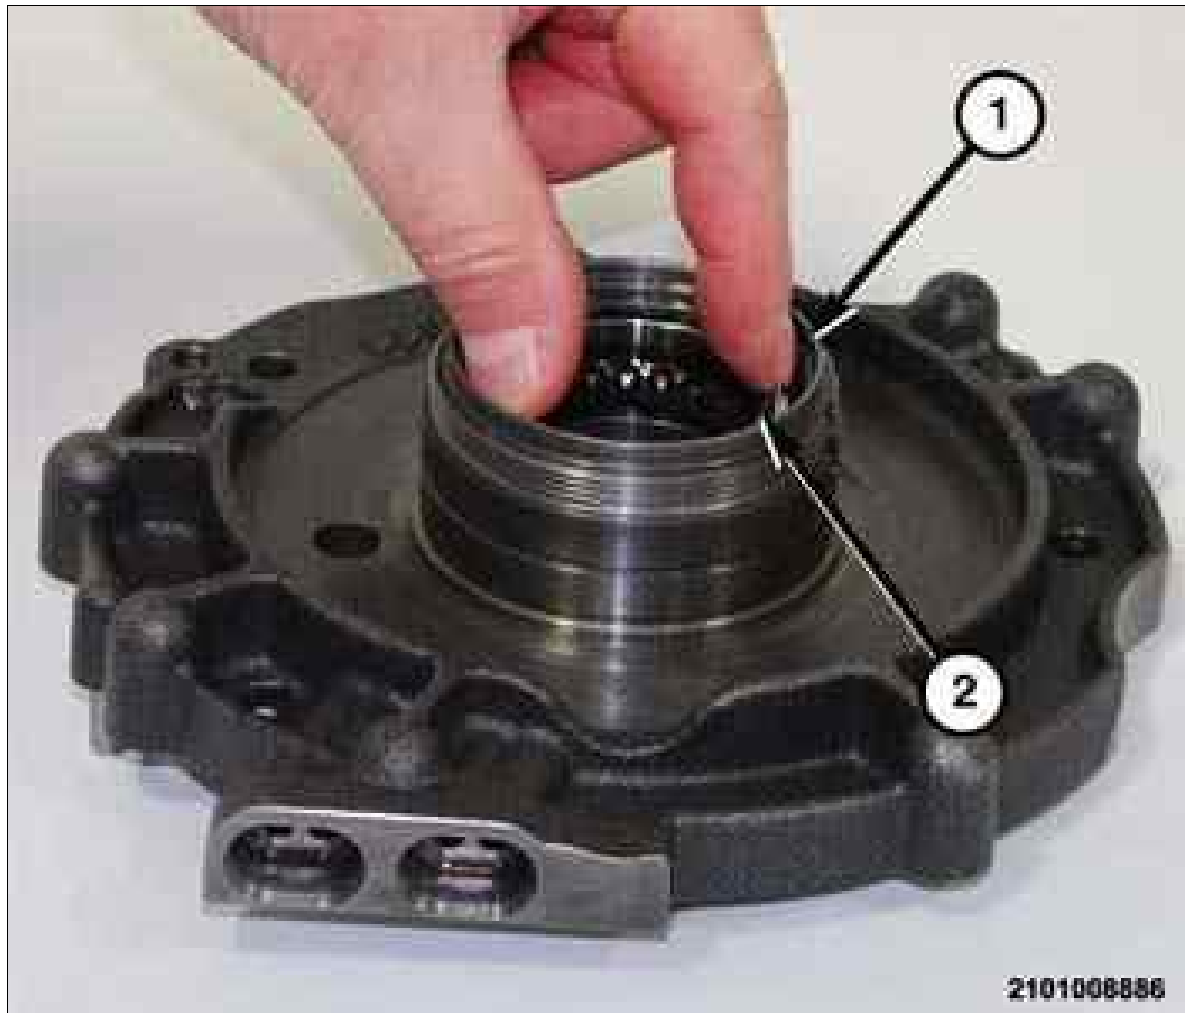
Installing Dog F-Clutch Piston Into The Output Gear Support Hub
